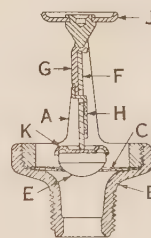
CROSS-SECTION OF SPRINKLER HEAD
